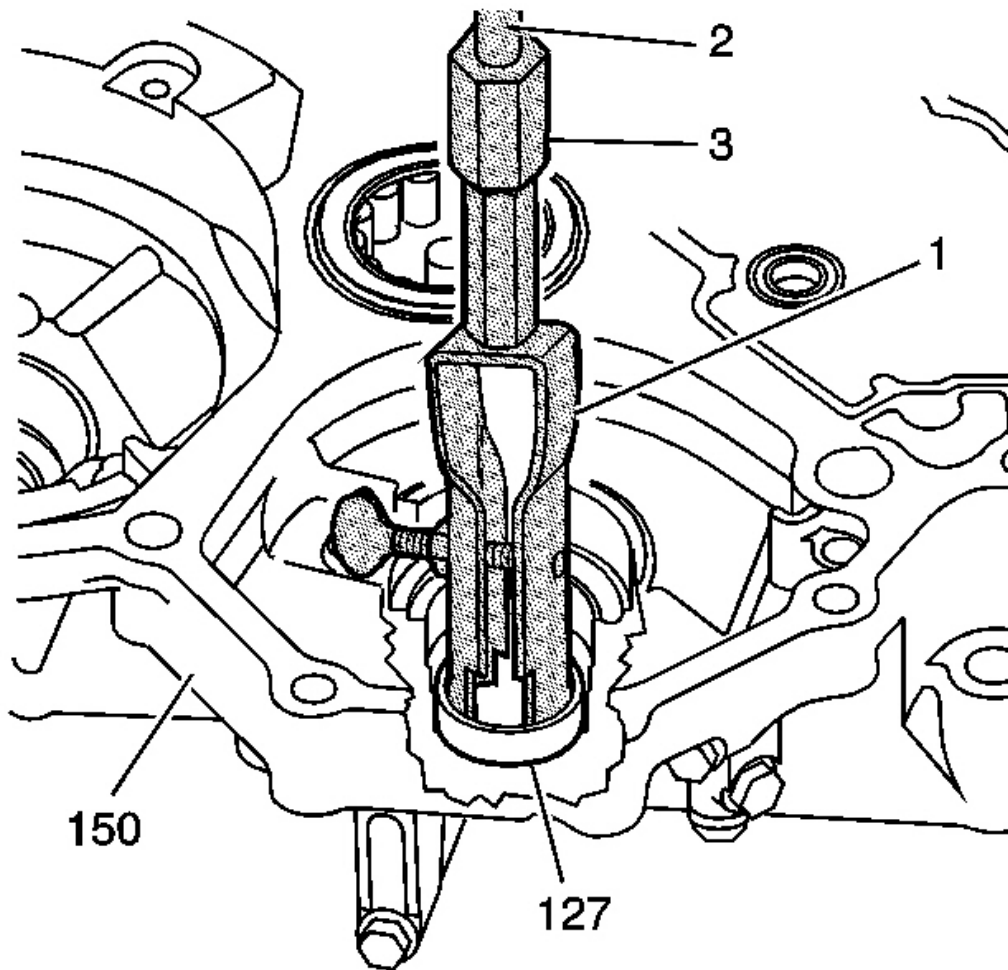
J 26941, SA9133T, SA9133T-1 & 1st/2nd Clutch Shaft Front Bearing
